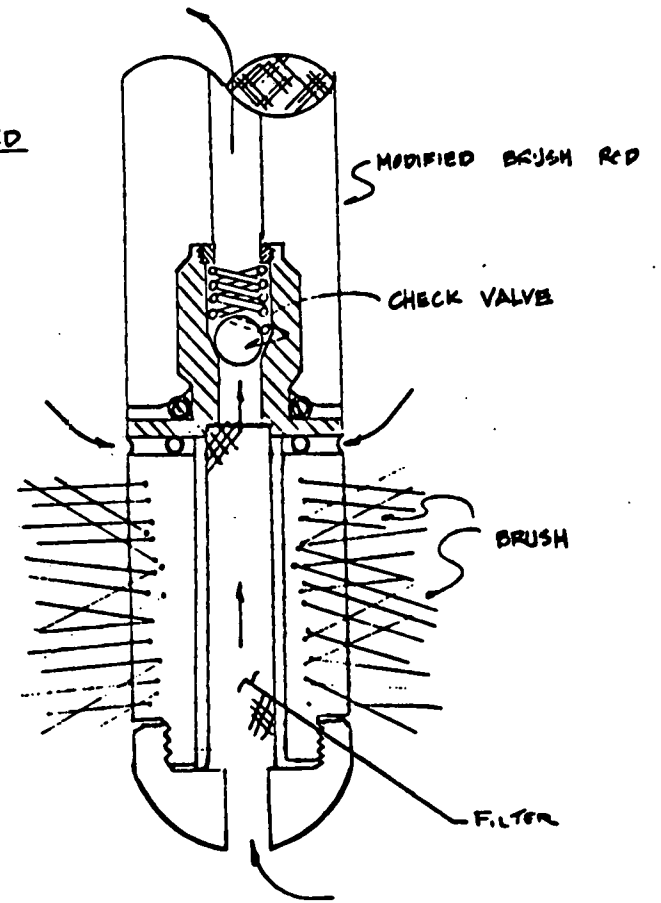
RESERVOIR LOCATION AND BRUSH ASSEMBLY
